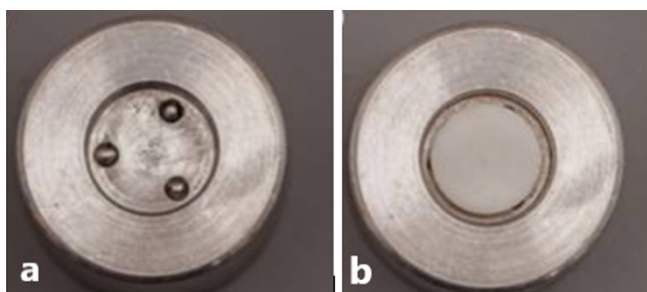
(a) Metal housing device with three balls to support the discs. (b) Specimen positioned in contact with three balls.
